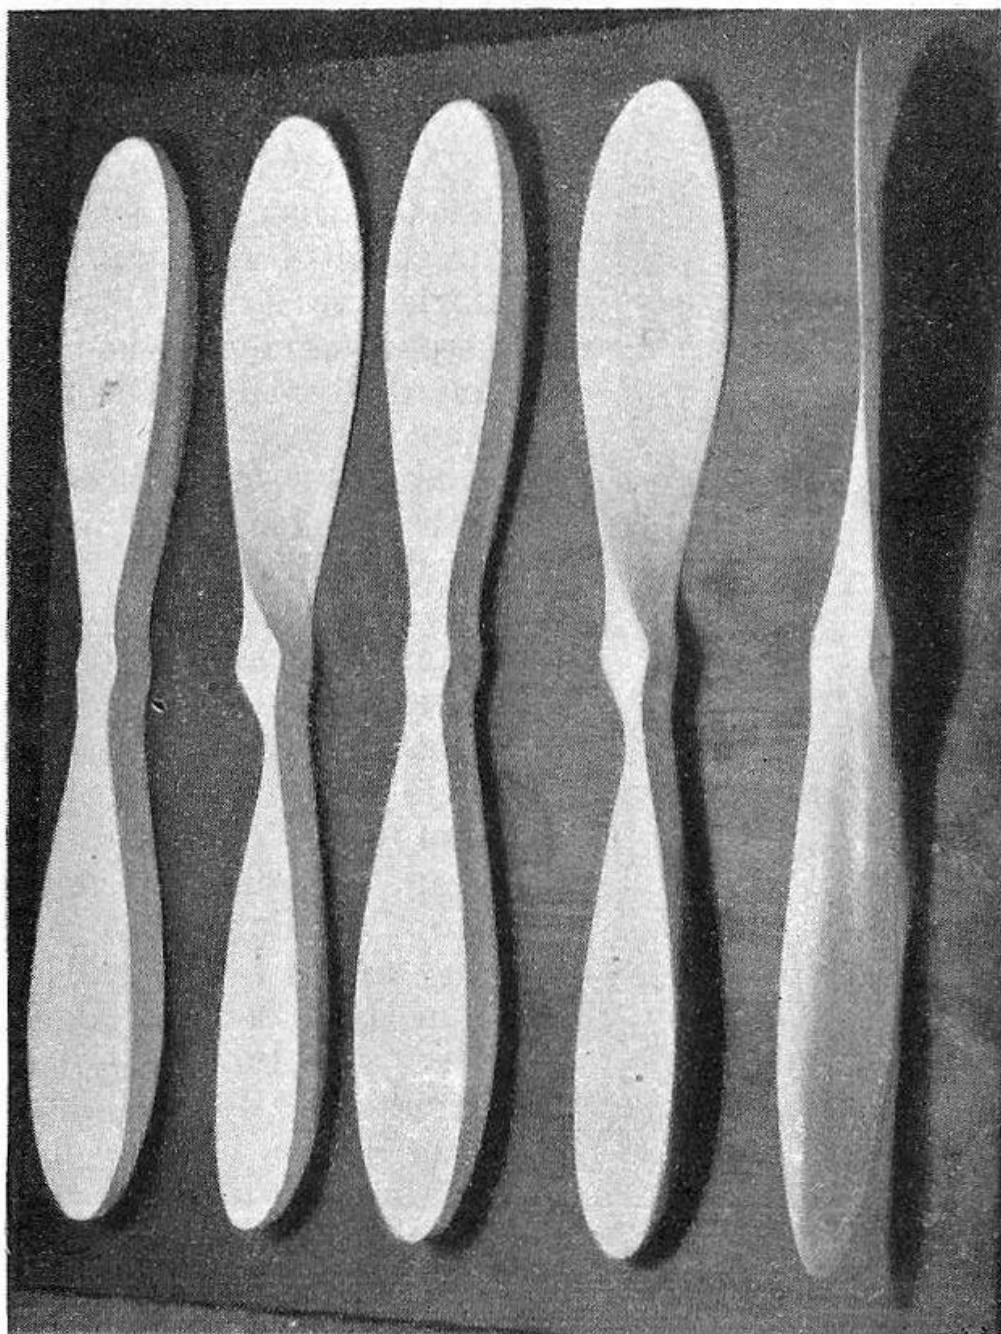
Reading left to right: (1) Rear of blank marked out. (2) Rear of blank carved. (3) Front of blank marked out. (4) Front of blank carved. (5) Finished propeller
